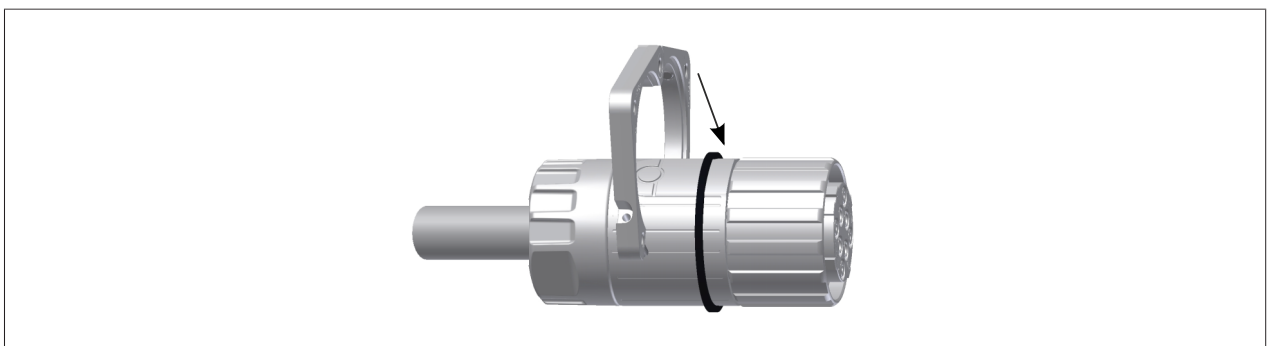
Attaching the metal flange to the connector (rear panel installation)
